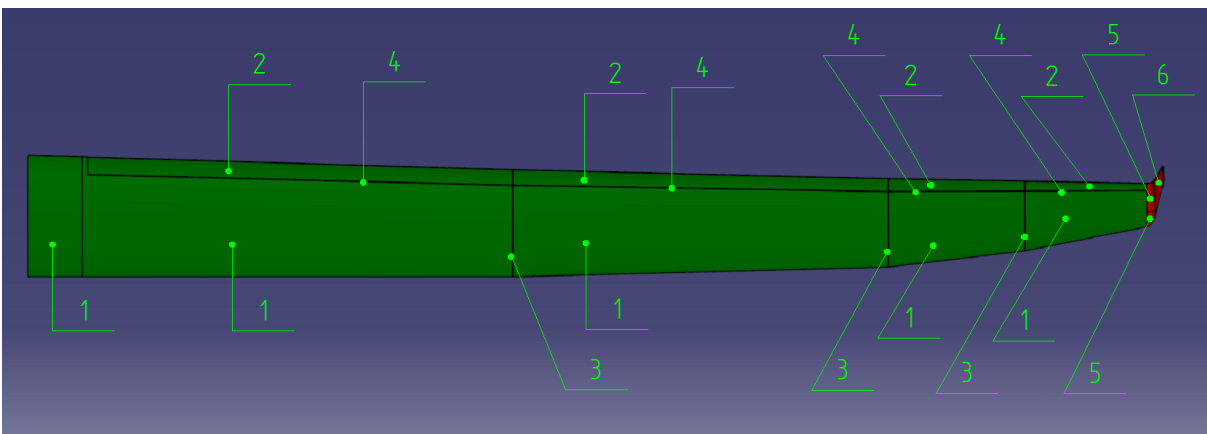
Individual surfaces of the wing and winglet lower side
